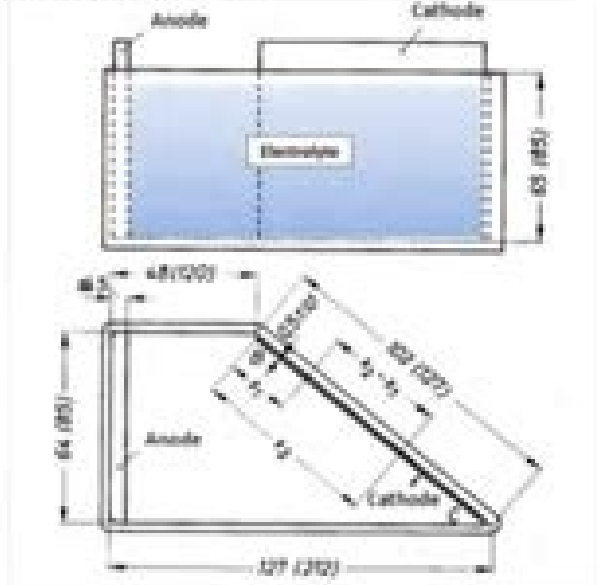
250 ml Hull cell top and side view with dimensions in mm (between parentheses: 1:1-Hull cell) [9]
